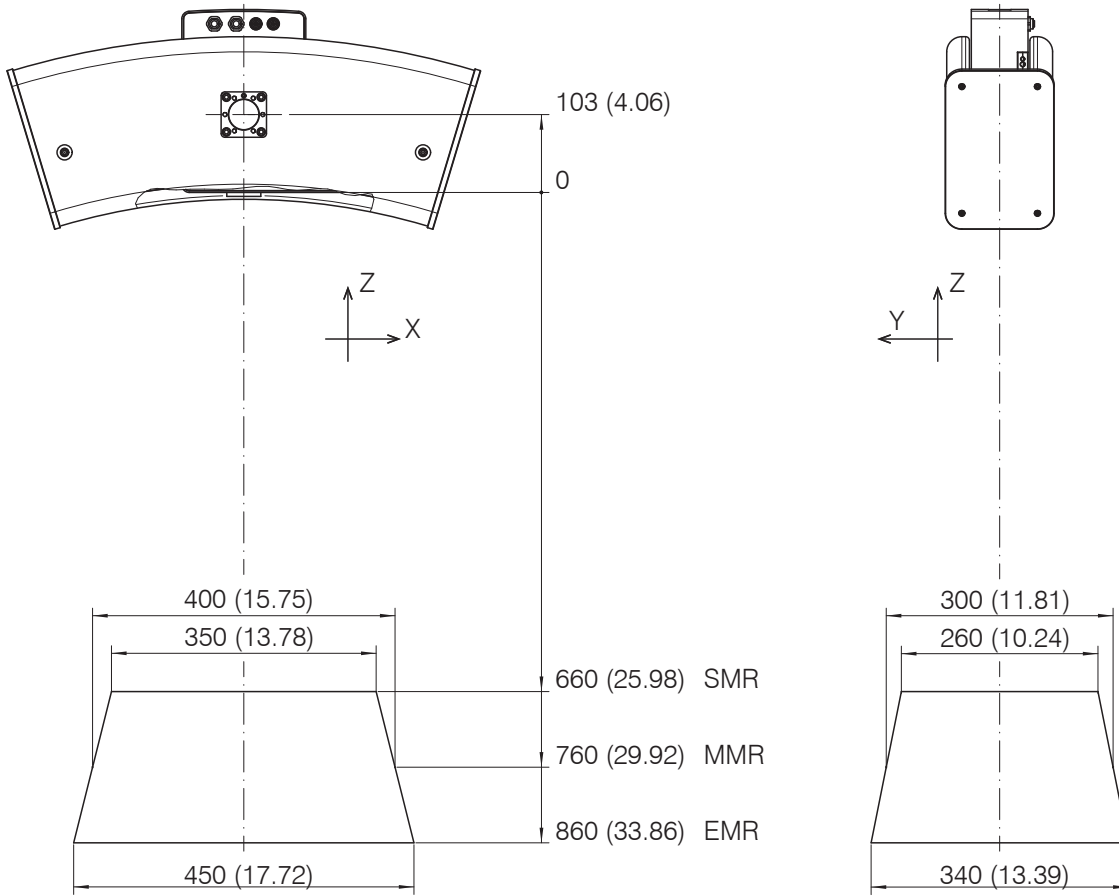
Dimensional drawing of surfaceCONTROL 3D SC25x0-400 measurement area, dimensions in mm (inches, rounded off)
